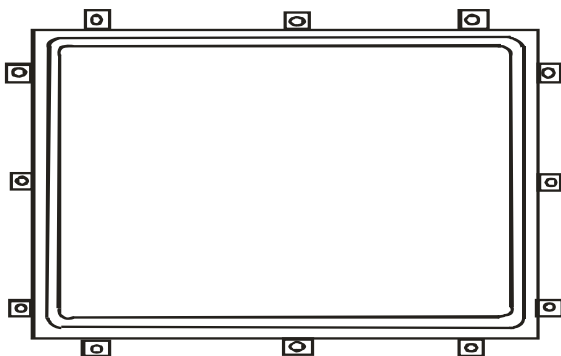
Schematic of fastening the sealing hose and corners of the delay of door.
